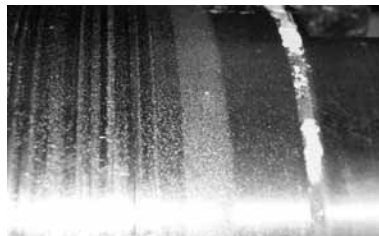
Blower cover with a damaged Fe13Cr coating by rotor displacement
